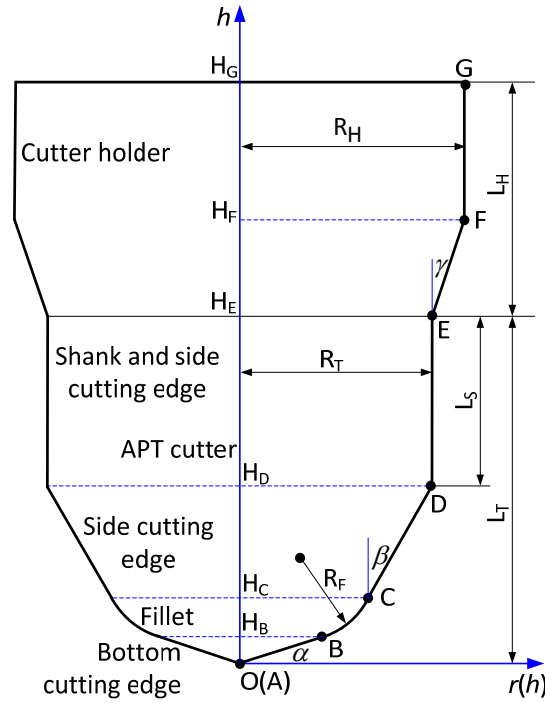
The geometric model of the tooling system including the APT cutter and the tool holder.
